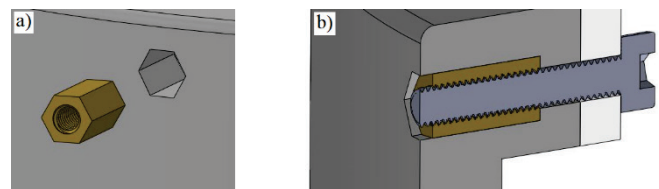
Thread joint: a) Pocket for Hex bolt, b) Cross-section of thread joint
